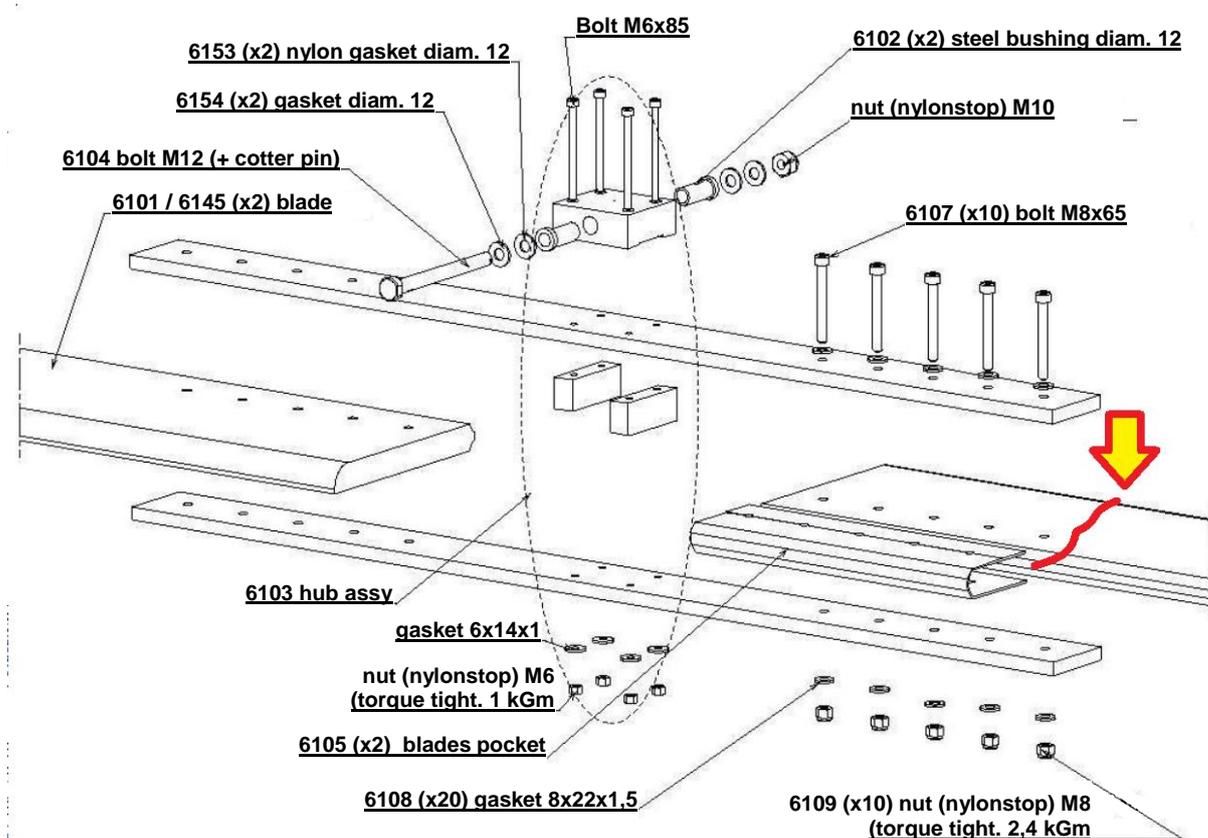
ZEN1 gyroplane rotor hub assembly diagram. The arrow marks the place of the blade fracture. [source: ZEN1 gyroplane maintenance manual]
